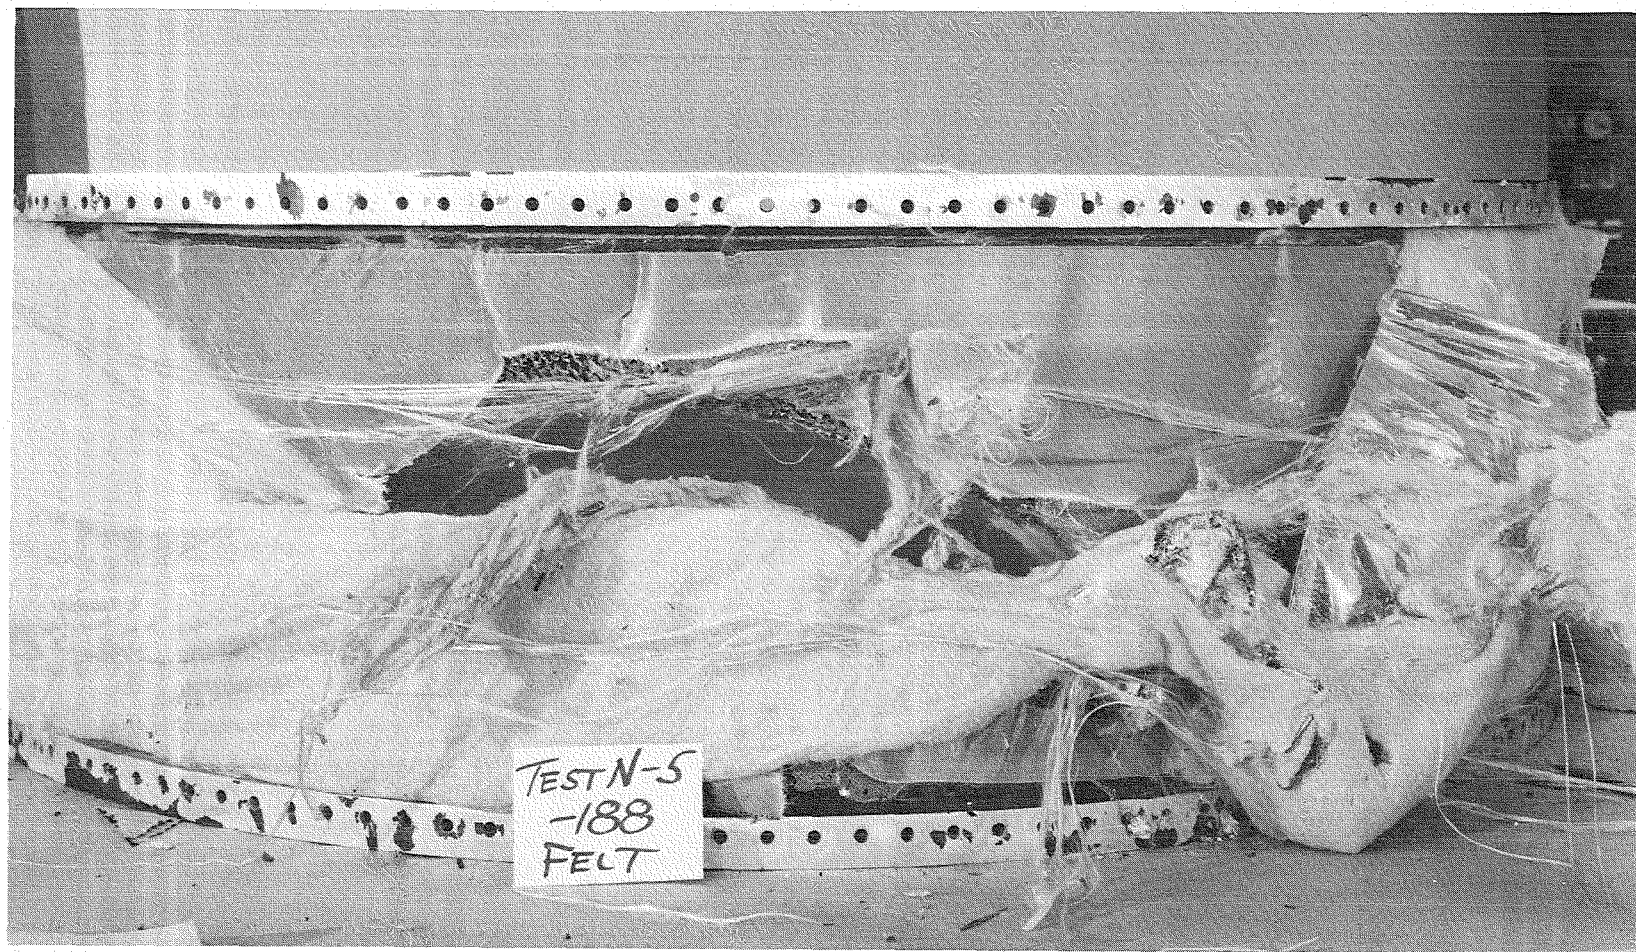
Exterior View - Test 5 - Cloth Removed - Concept B.
